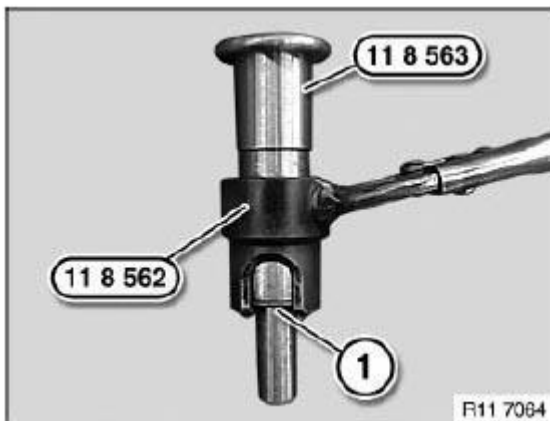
Identifying Special Tools 11 8 562 And 11 8 563
